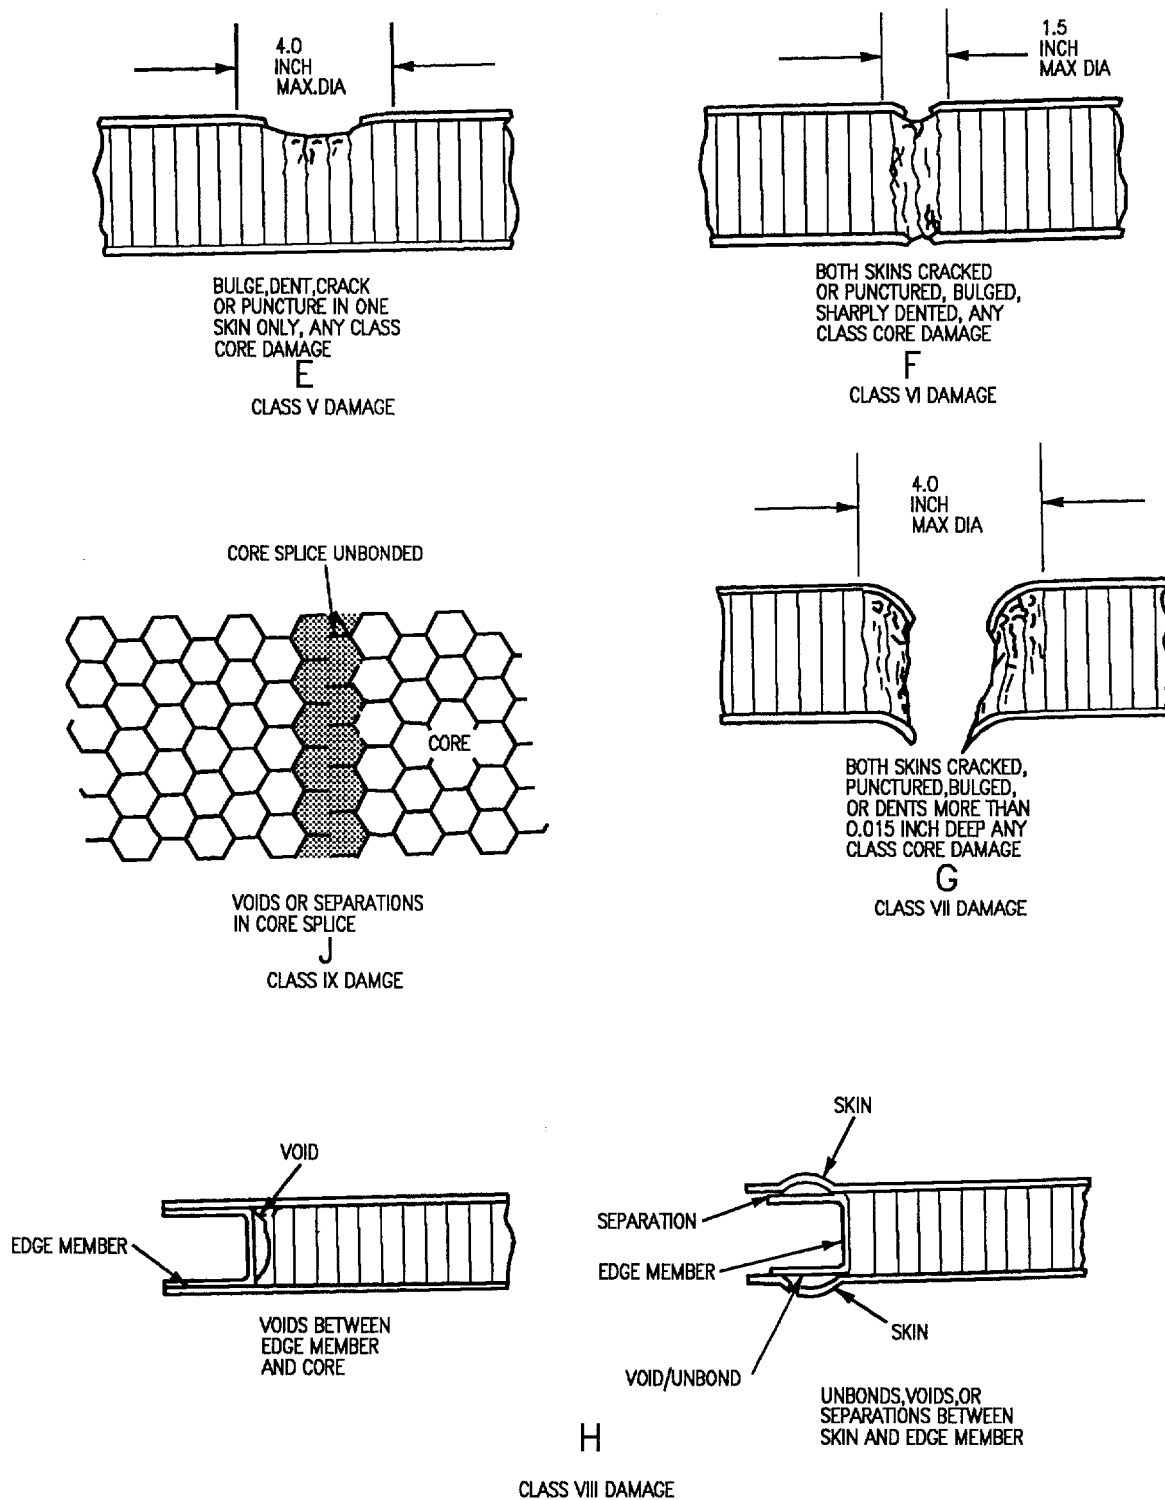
Repairable Damage Aluminum Honeycomb Core (Sheet 2)
